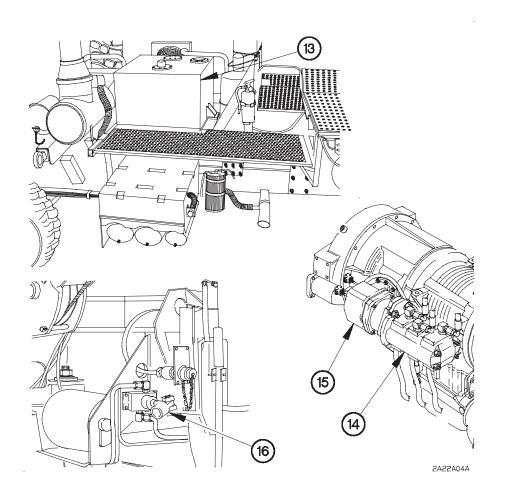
Material Handling Crane (MHC), 30K Winches, and Underlift Assembly (Cont)
